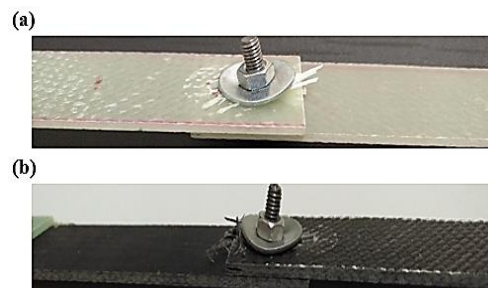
Tested single-lap bolted composite joint a) JI, b) JIIN
